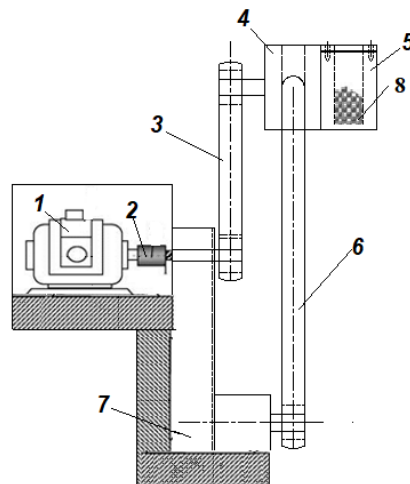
General view of the vibro-planetary activator: 1 - electric motor; 2 - coupling; 3 - crankshaft; 4 - rock; 5 - mechanoactivator; 6 - guiding lever; 7 - grinder housing; 8 - grinding balls.
